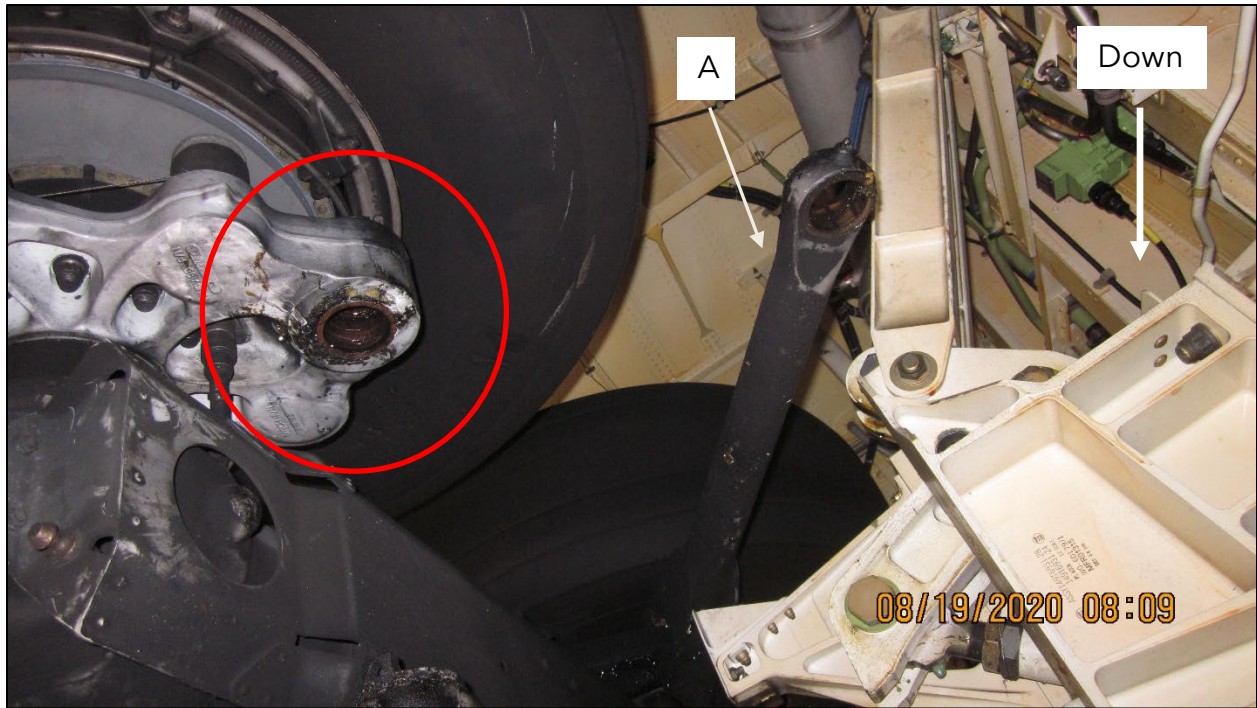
Photograph of the landing gear with the brake rod hung up on the landing gear upstop. Arrow "A" points to the brake rod. The red circle highlights the location where the brake rod should have been secured by the attaching hardware detailed in Figure 3. Courtesy of FedEx.
